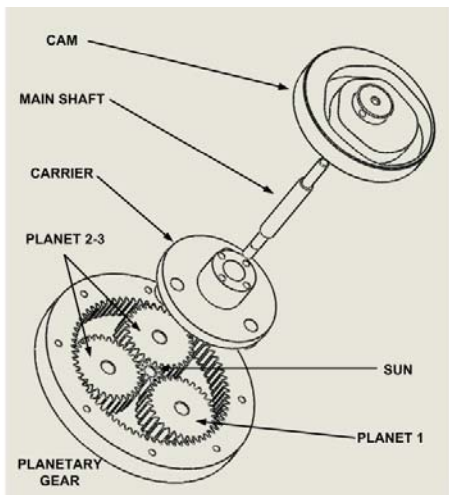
motion-generator is the assembly of a planetary gearhead and a cam mounted on the main shaft which delivers the motion.
